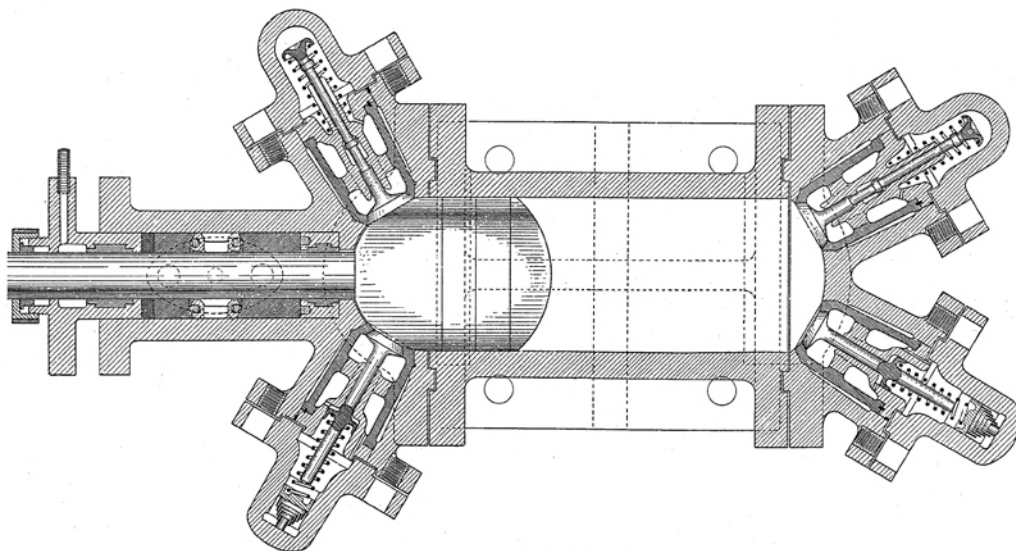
Compressing Cylinder of the Linde Ammonia Machine.
